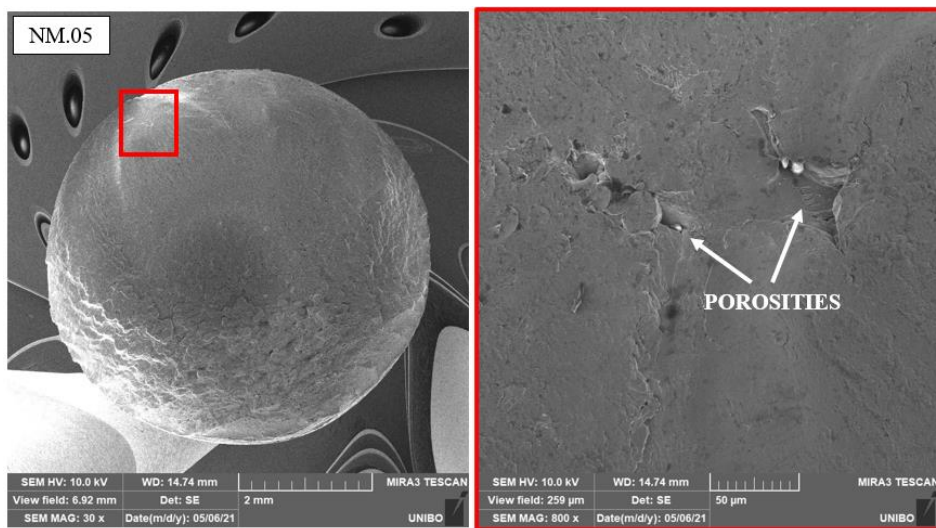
Crack initiation source in a machined sample. Sub-surface porosities.
